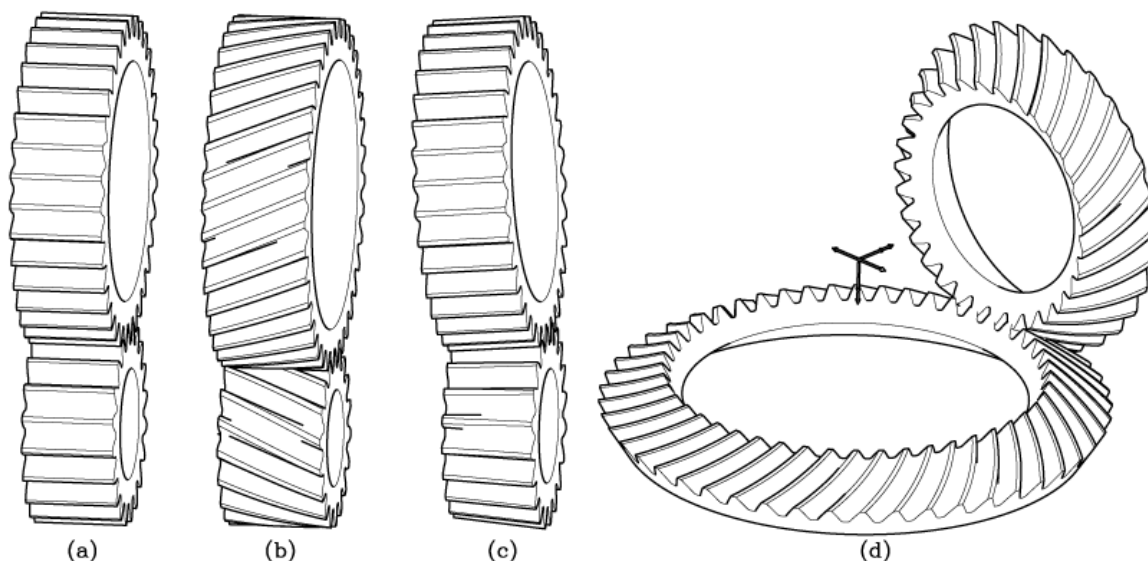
Geometric models of gears generated by IGD – Integrated Gear Design: (a) spur gear set; (b) helical gear set; (c) beveloid gear set; (d) spiral bevel gear set.
